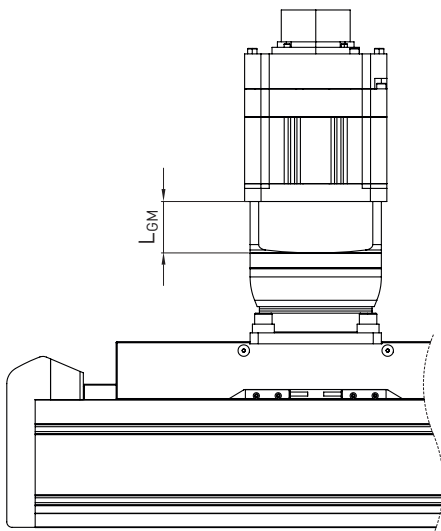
Motor connection of linear table HT-B without gearbox
